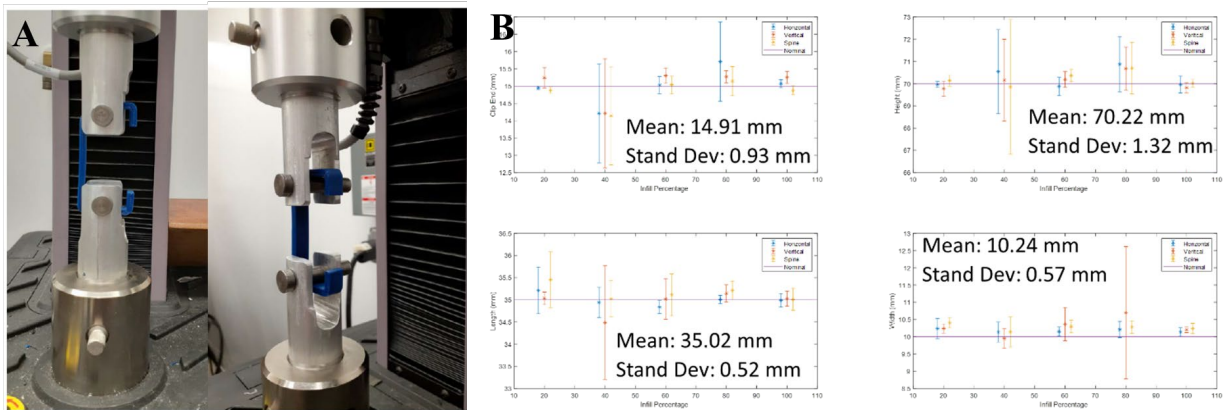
(A) A 3D printed c-shape set up on a tensile testing machine to determine the force and location at which failure occurs. (B) An example of summarized data to illustrate dimensional accuracy as a function of infill percentage and print orientation, created by the instructor
